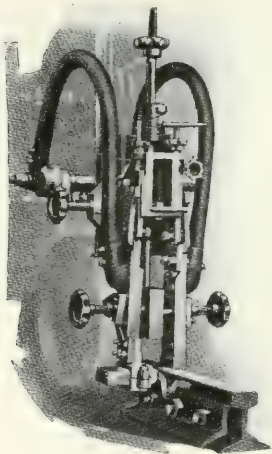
DETAIL VIEW OF GRIP USED ON RAIL BONDING CAR
